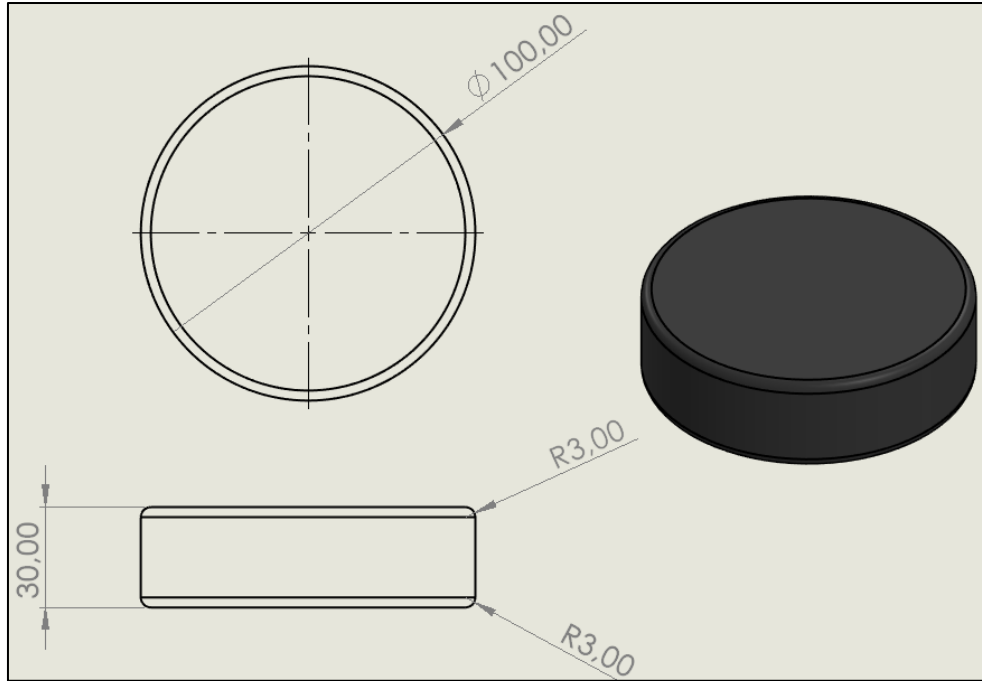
12: Technical drawing of the cylinder object to be collected (in millimeters)
